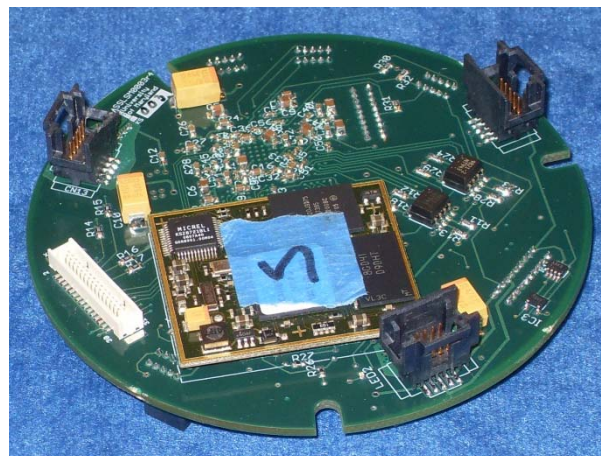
Top of the CPU board showing a SOM plugged into its socket
